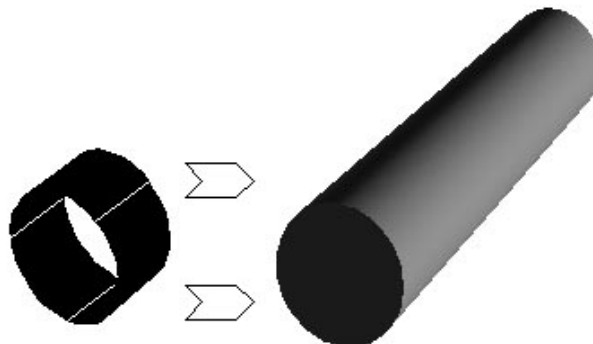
One weld can be recorded onto more than one film. Overlapping films are fixed along the weld.
